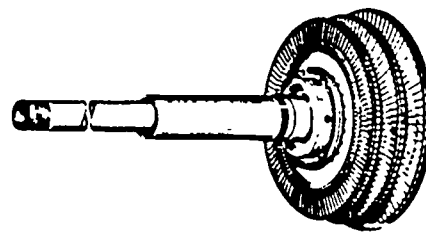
Illustrates the _____ Section of a Turbojet Engine.
